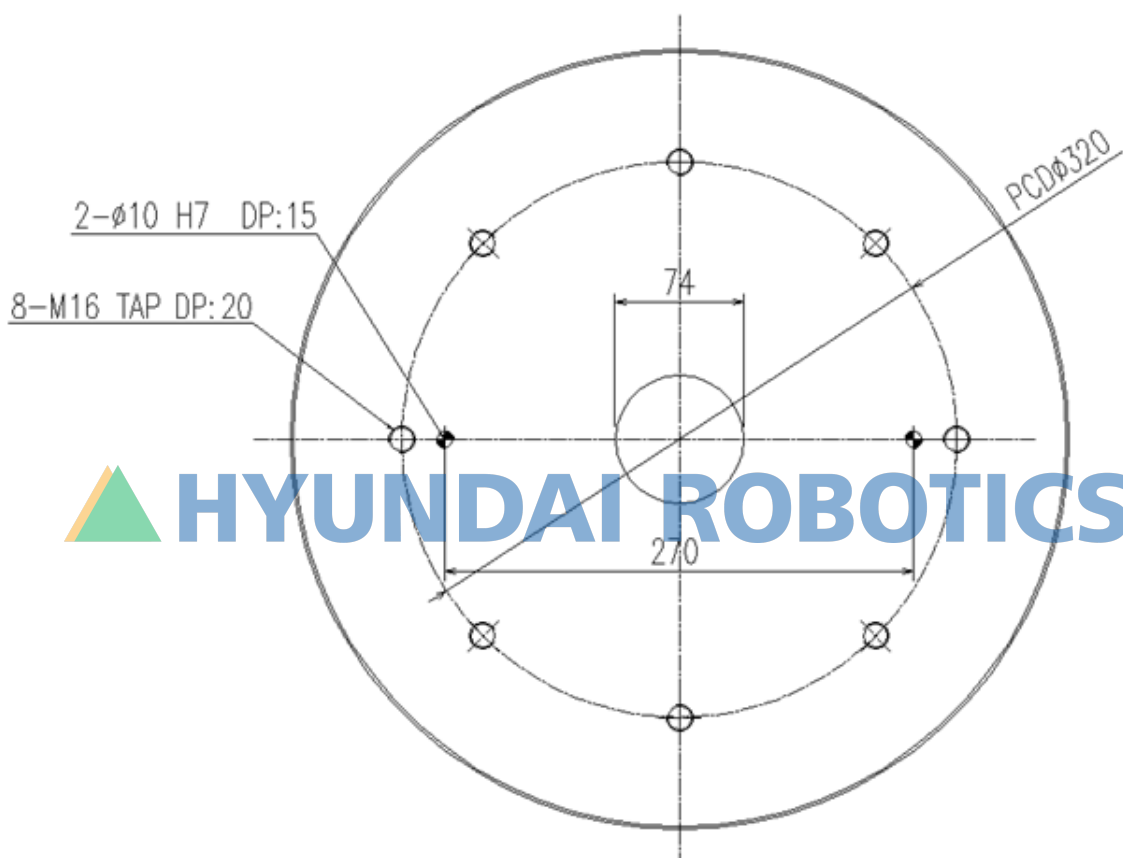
Detailed Drawing of the Mechanical Interface Attachment Surface
